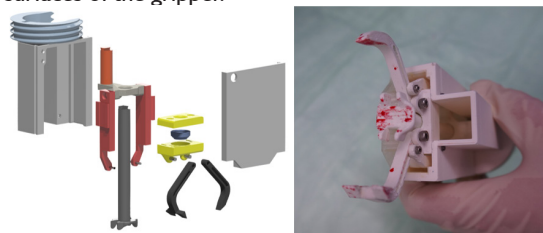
Gripper designed for toolless disassembly (left), test contamination with sheep blood (right)
